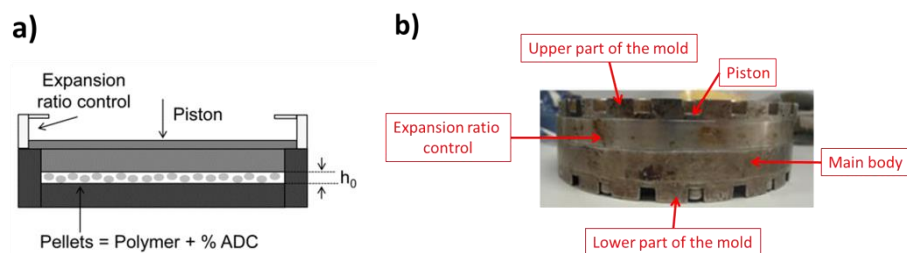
Mold employed in the ICM route. a) Scheme of the mold. b) Real image of the mold.
